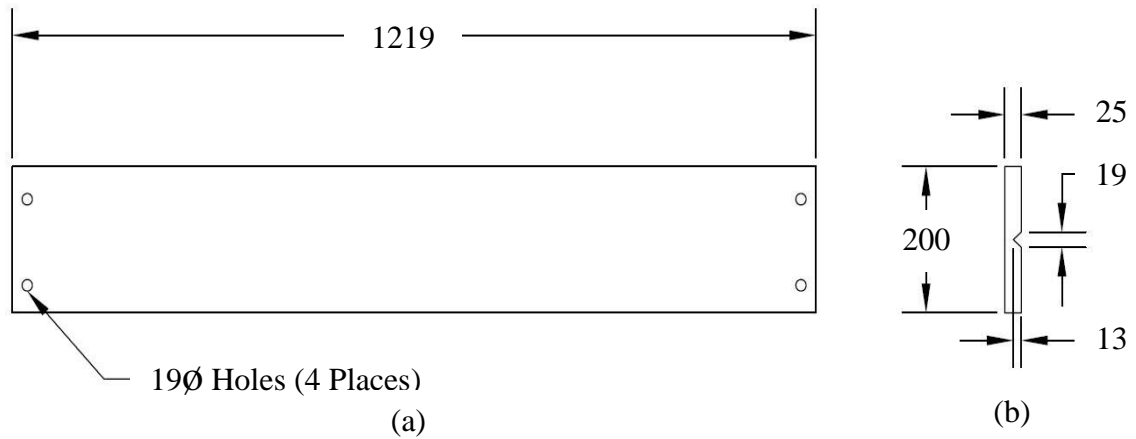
Groove Plate: (a) Top View, and (b) Side View (Dimensions in mm)
